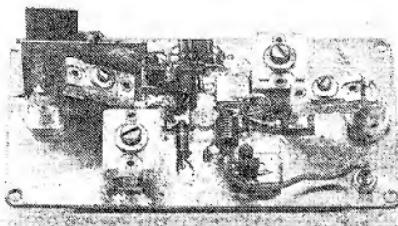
Solder the heat sink, but the 50W amplifier will fit inside a wave-dissipating box. Q1 is mounted on the bottom of the board. Input circuitry is to the left, output to the right. J1 and associated bias circuitry are behind the shielded brackets in J1.
